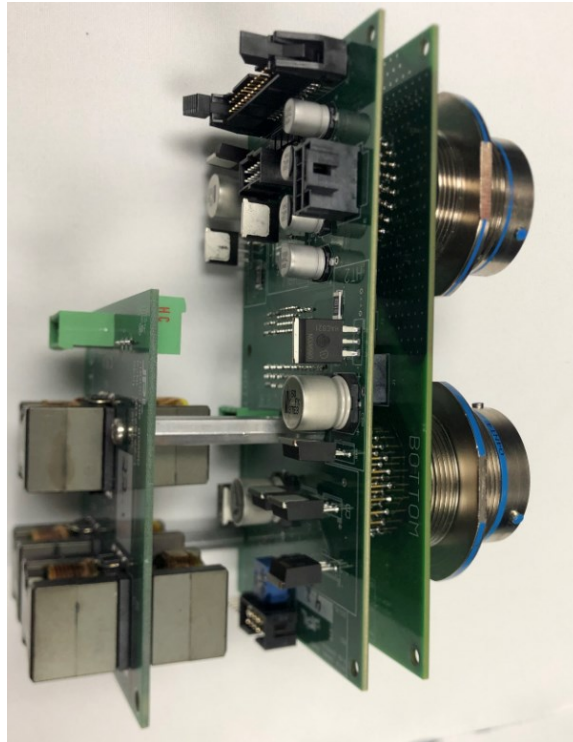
Actuator channel PCB stack. From right to left, Adapter PCB, Motor PCB, Inductor PCB.
